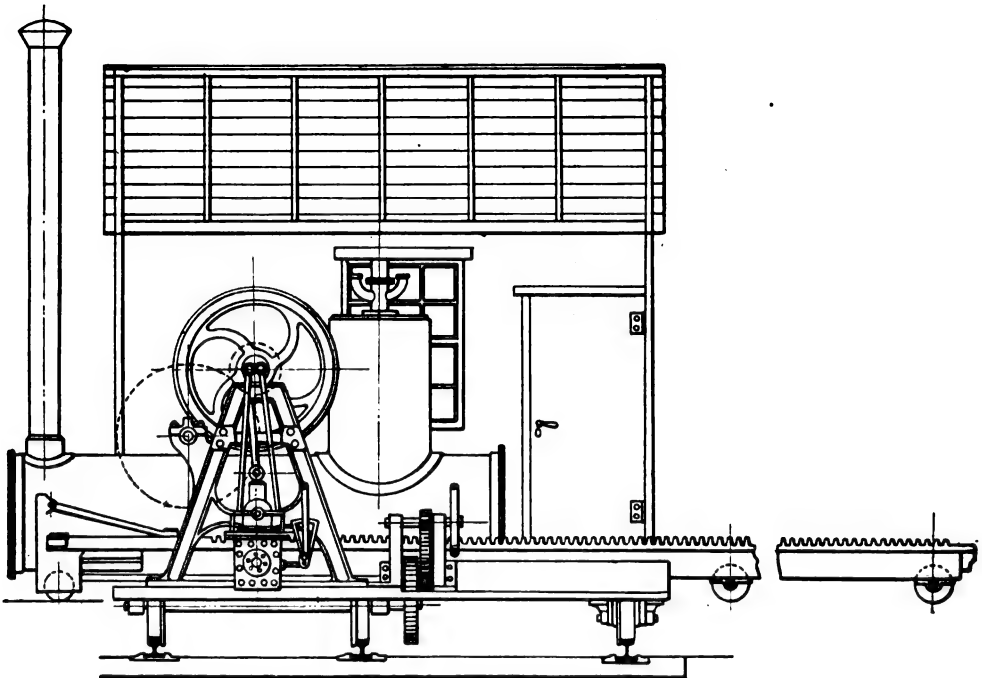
COKE PUSHING MACHINE (RAM) FOR RETORT COKE OVENS. MADE WITH OR WITHOUT BOILER, VERTICAL OR HORIZONTAL ENGINE.
